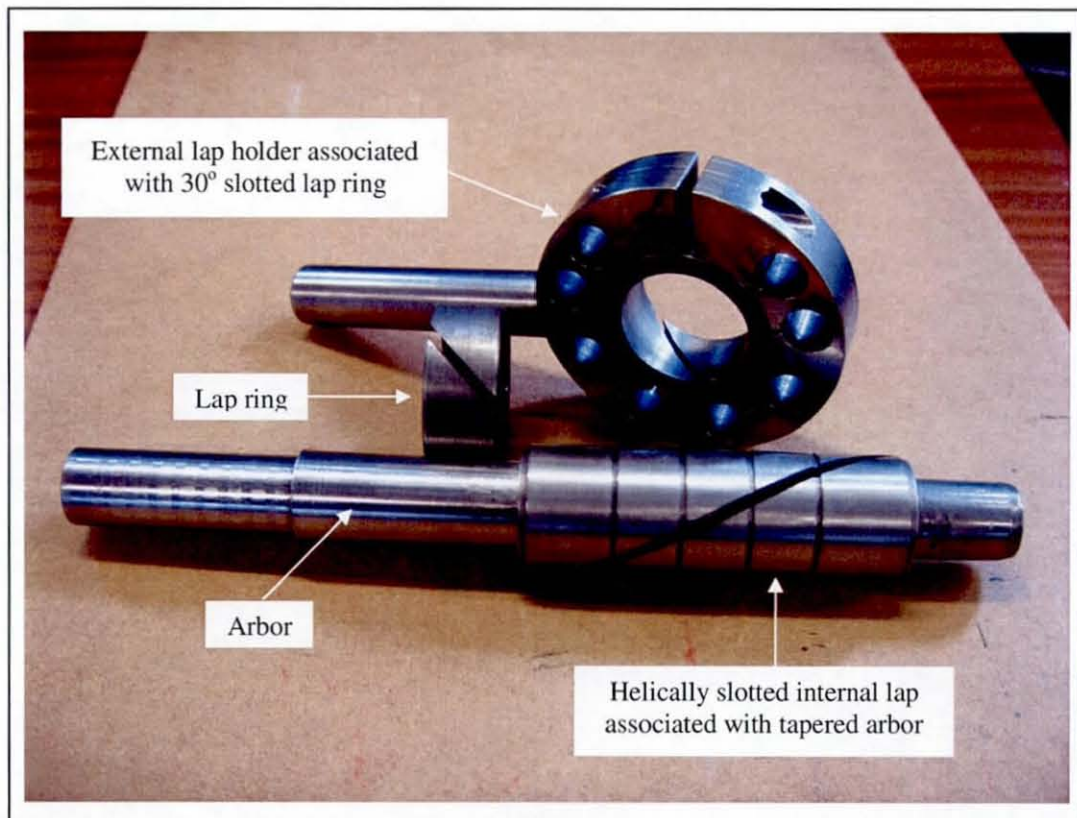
External and internal lapping tools used in trimming and matching of the piston and cylinder blanks
